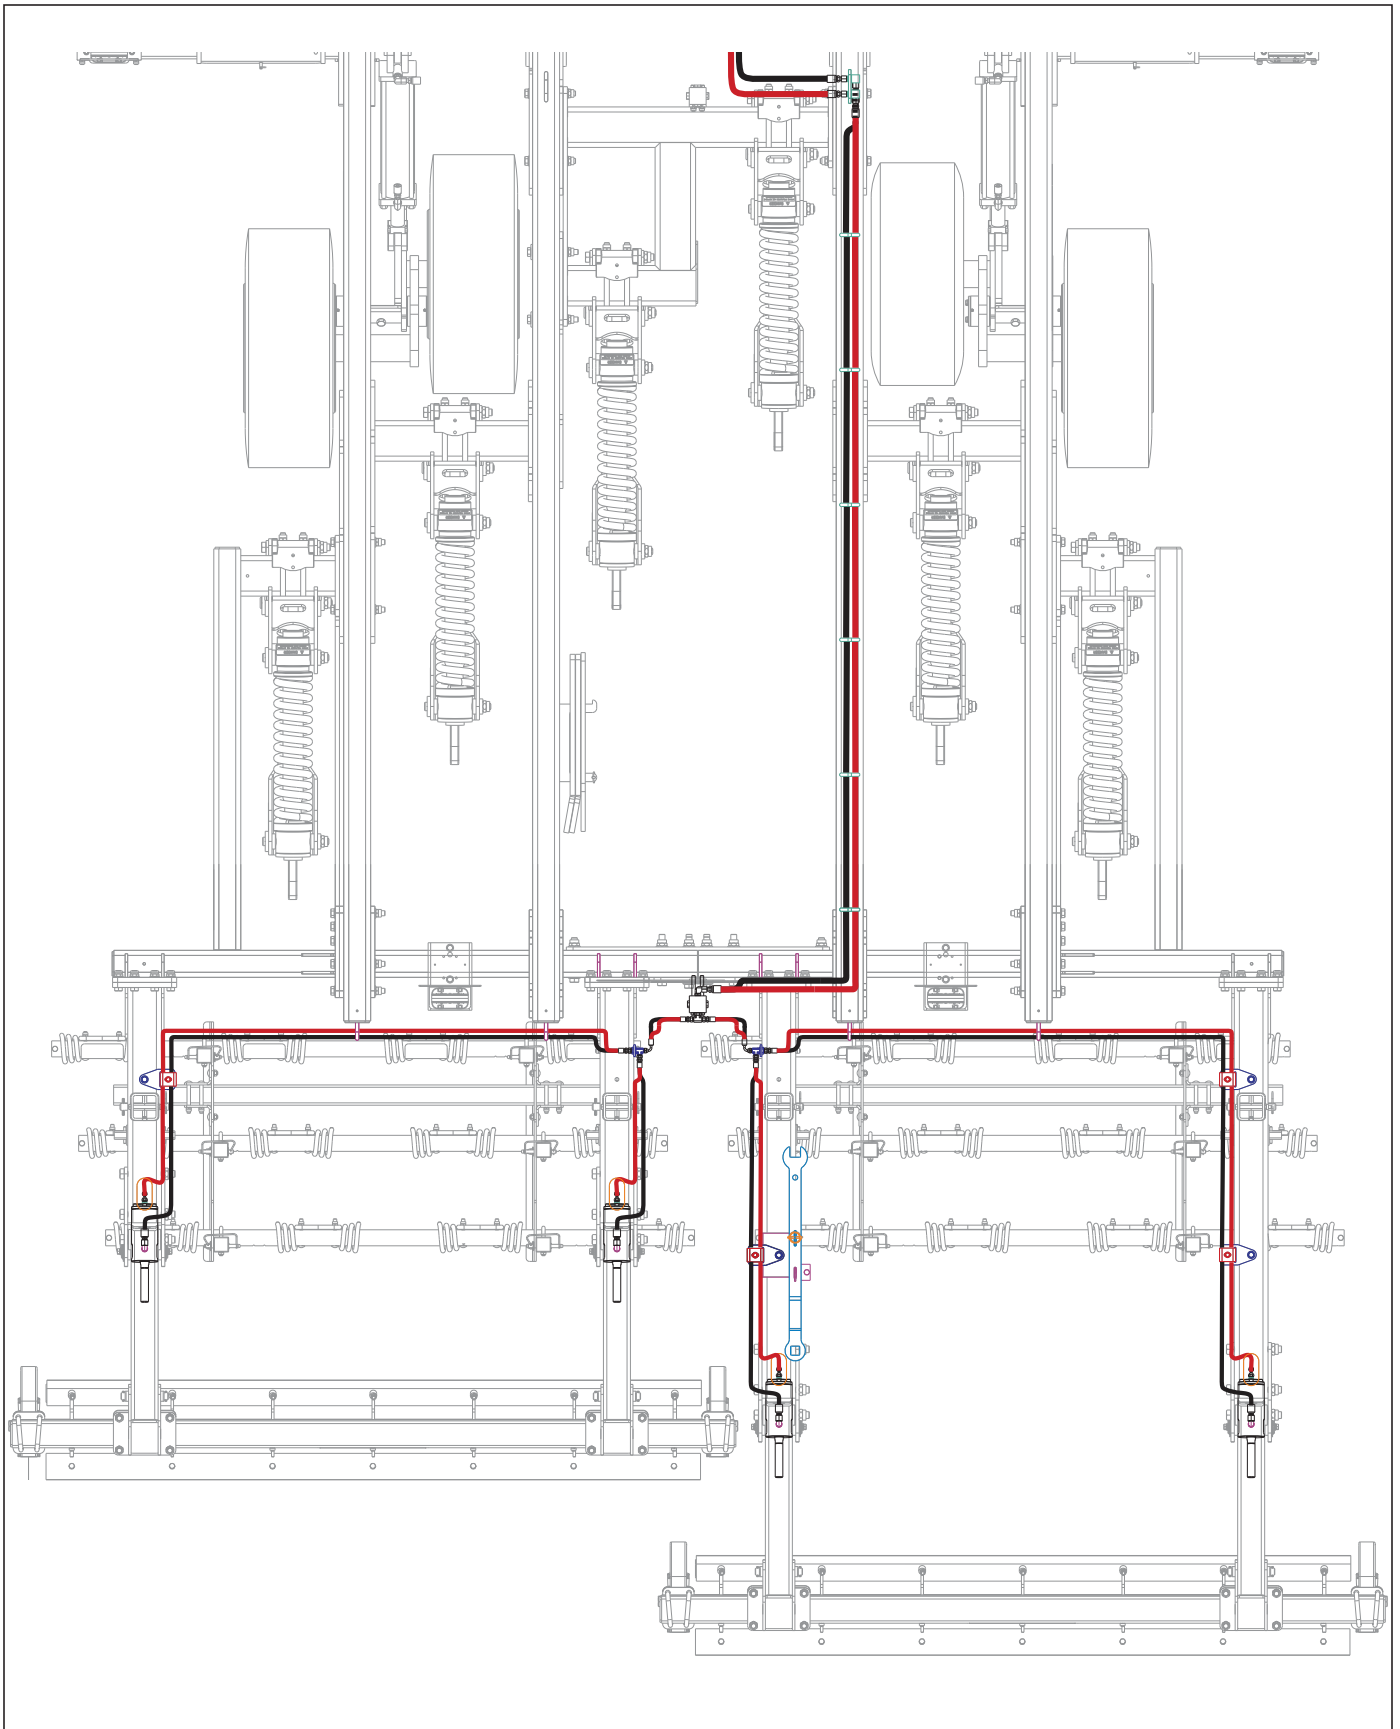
3BCT/Chopper Hydraulic Layout 2411-06
